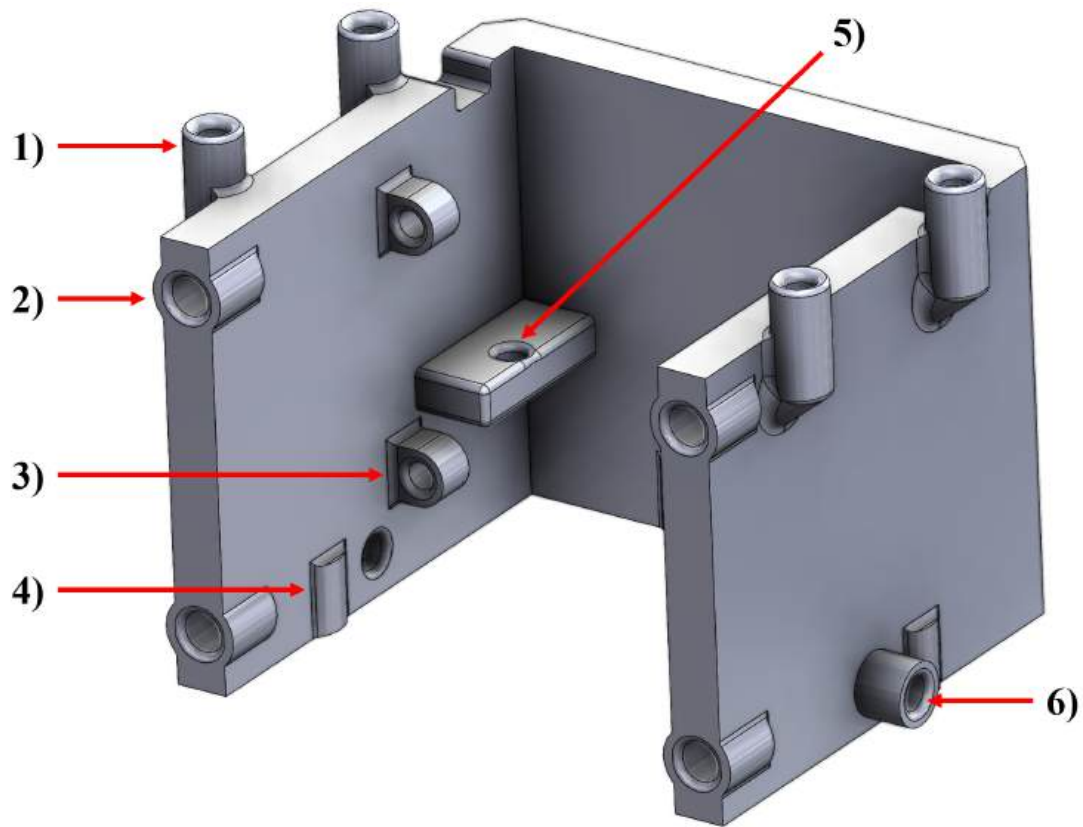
CAD Housing with labeled mounting points. 1) Mounts for Adafruit Feather microcontroller. 2) Mounting hold for the removable wall. 3) Mounting hole for compliant bistable mechanism. 4) Anchor point for incoming cables. 5) Mounting point for Servo. 6) Cable port for incoming and outgoing wire. The cable port also fixes the location of the compression spring.
